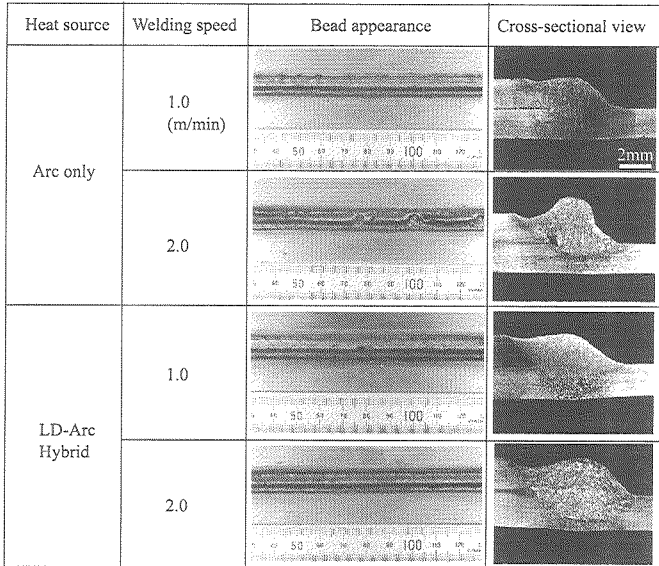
Bead appearance and cross-sectional views of arc-welded and hybrid-welded specimens.
